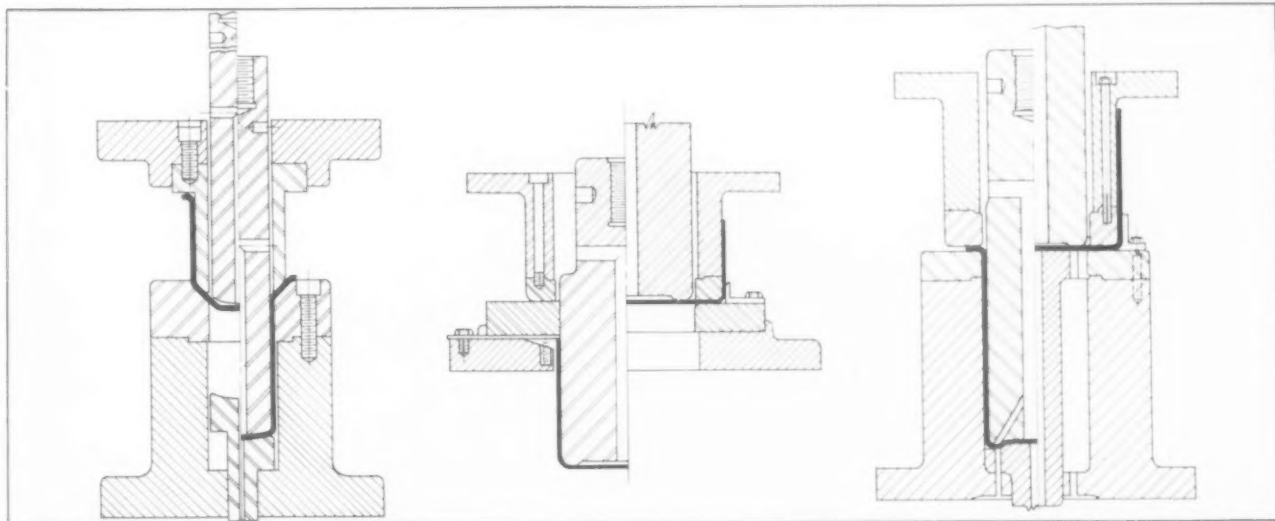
, at left, shows a redraw tool for the shell previously drawn in Fig. 67. The sleeve of the knockout fits inside the shell and grips the bevelled nose of the shell, which is resting in the die. The punch redraws the shell and bottoms on the knockout at the end of the down-stroke to form a dome on the bottom of the drawn shell. This tool is suitable for shells of substantial thickness on which a flange is desired. If no flange is required, the shell may be drawn through and stripped off the punch as shown in Fig. 71, at center. Fig. 72, at right, shows a redraw tool similar to the one shown in Fig. 70, except that the metal is moved through a right-angle turn instead of the 45° bevel. An embossed pad is formed on the bottom of the shell by the punch bottoming on the knockout.
